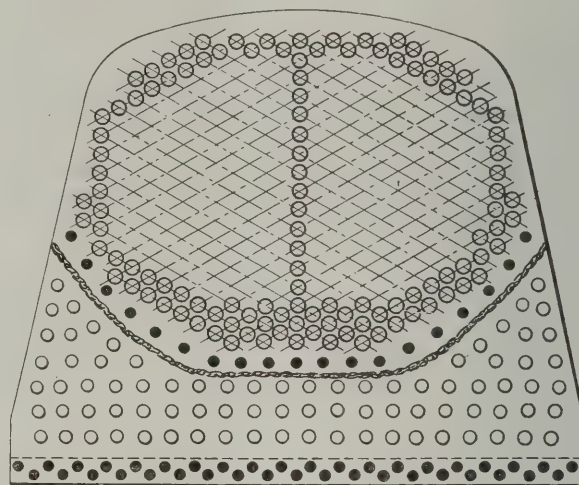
Method of Applying New Tube Sheet Section; Gas or Electric
